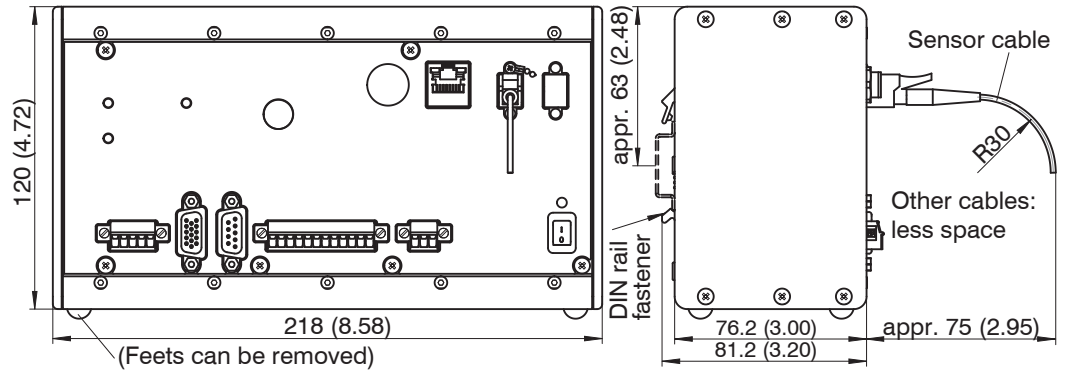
Dimensional drawing BCC2410, dimensions in mm (inches), not to scale
